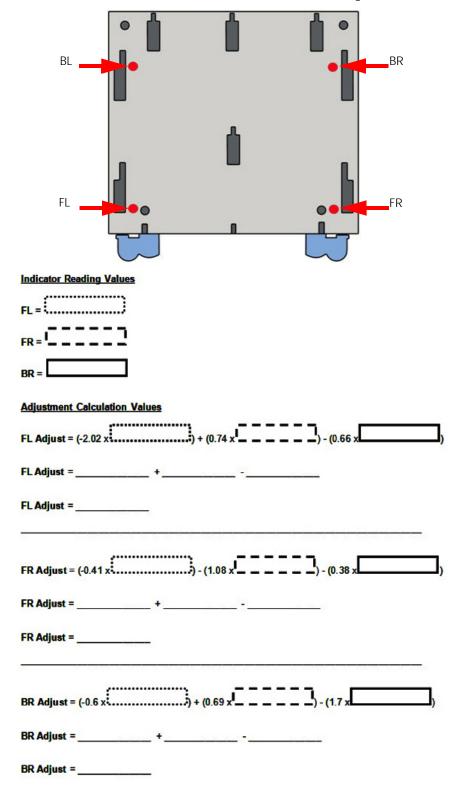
uPrint Plus and uPrint SE Plus measurement points and worksheet
